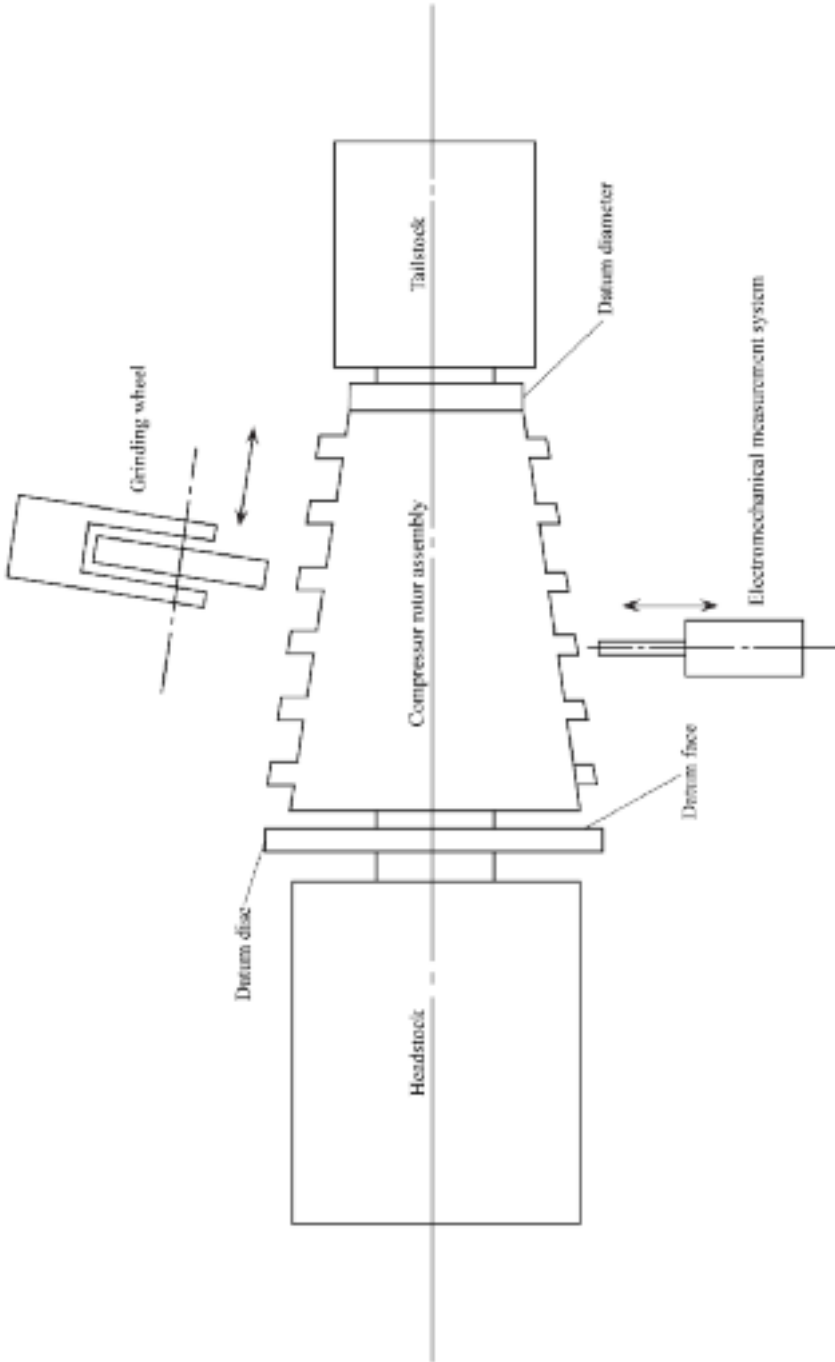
A schematic view of a bladed disc assembly fitted on a grinding machine with datum discs and an electromechanical measurement system.
